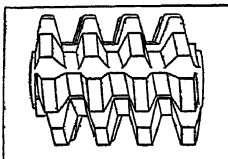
A HOB WHICH CUTS TEETH AS THE GEAR REVOLVES
